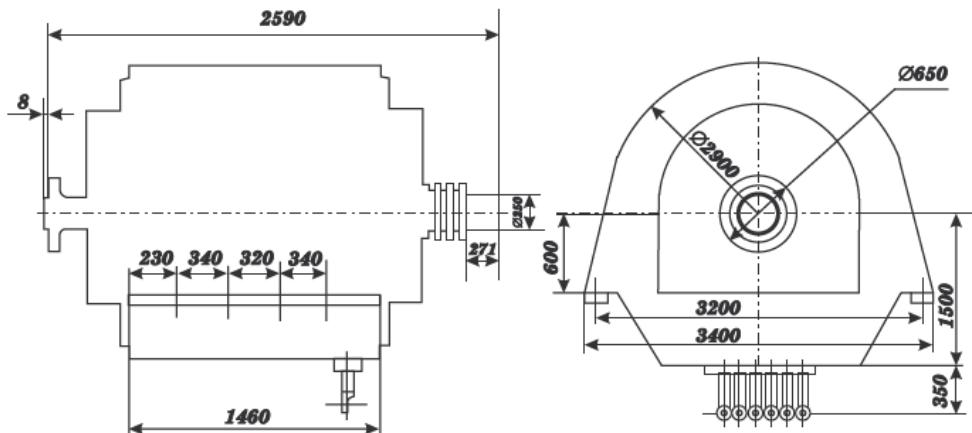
Overall and mounting dimensions of the motor AC3-17-64-8УХЛ4
